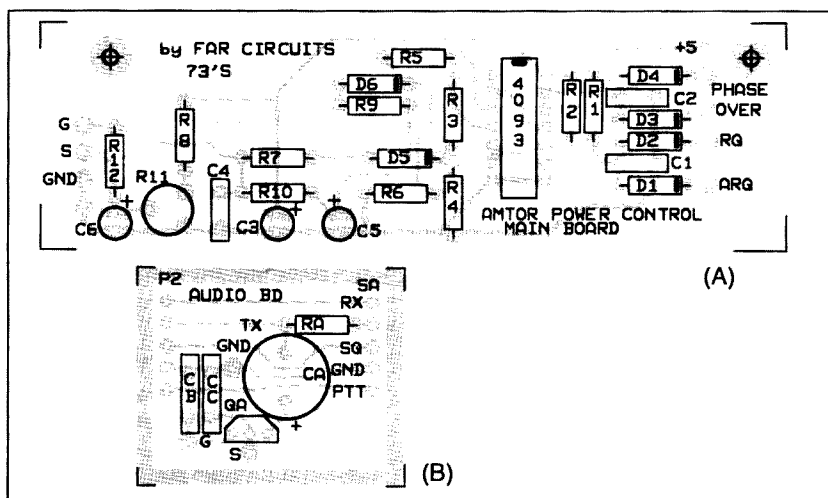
a) Main unit PC board parts placement diagram; b) Audio unit PC board parts placement diagram.
